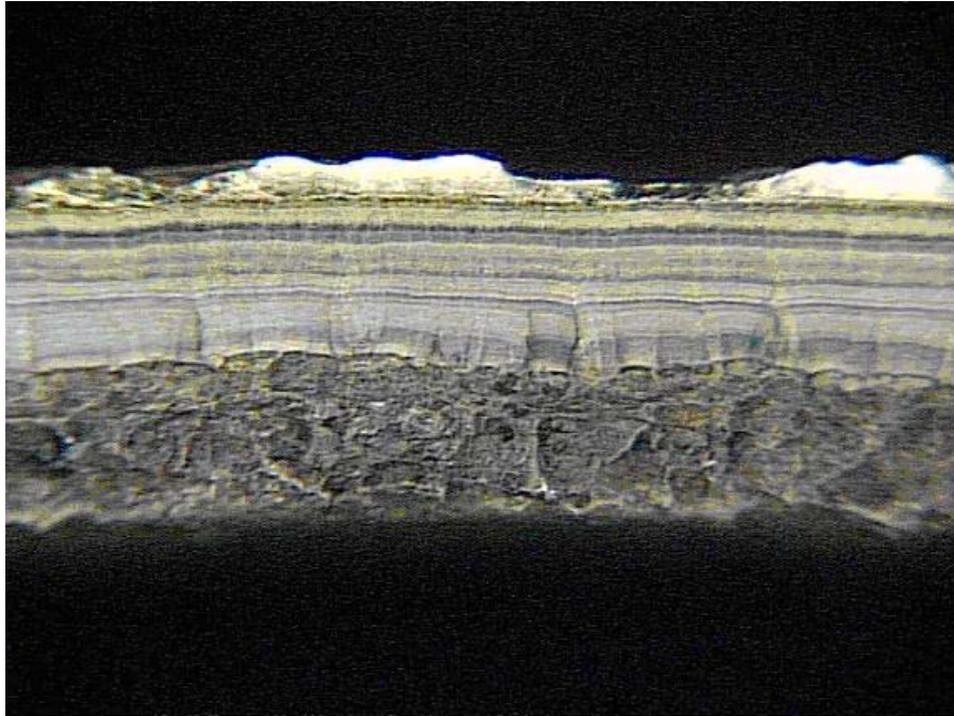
The surface of the fracture faces of the crack shown in Figure 4-31 and Figure 4-32.
